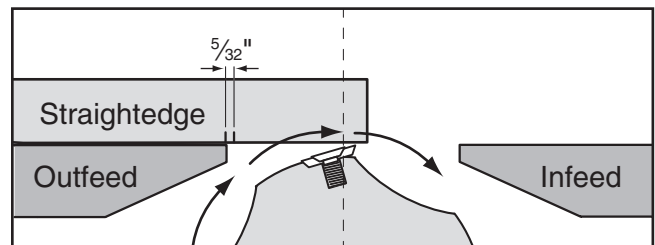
Cutter drags straightedge forward to line up 2nd mark with edge of outfeed table.
